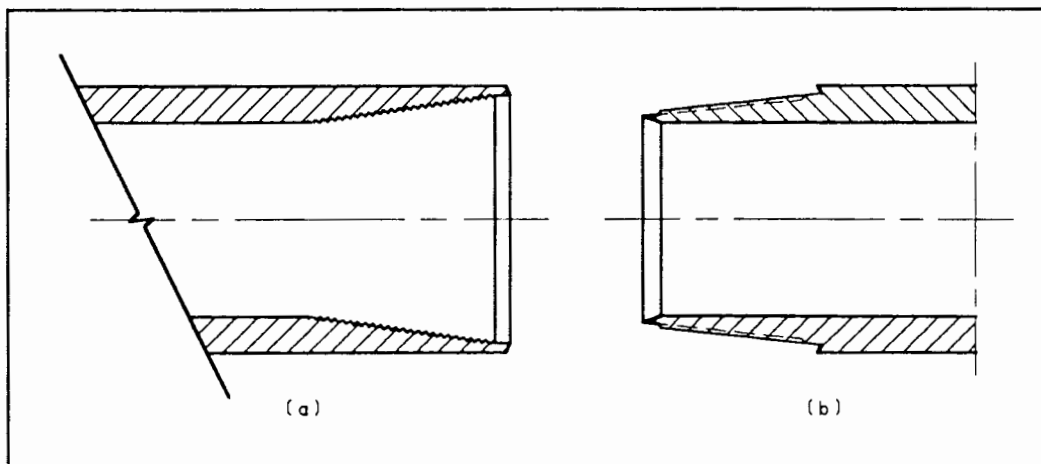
Drill rod taper (a) and steel coupling (b) used to make a composite drill rod of the required length.
